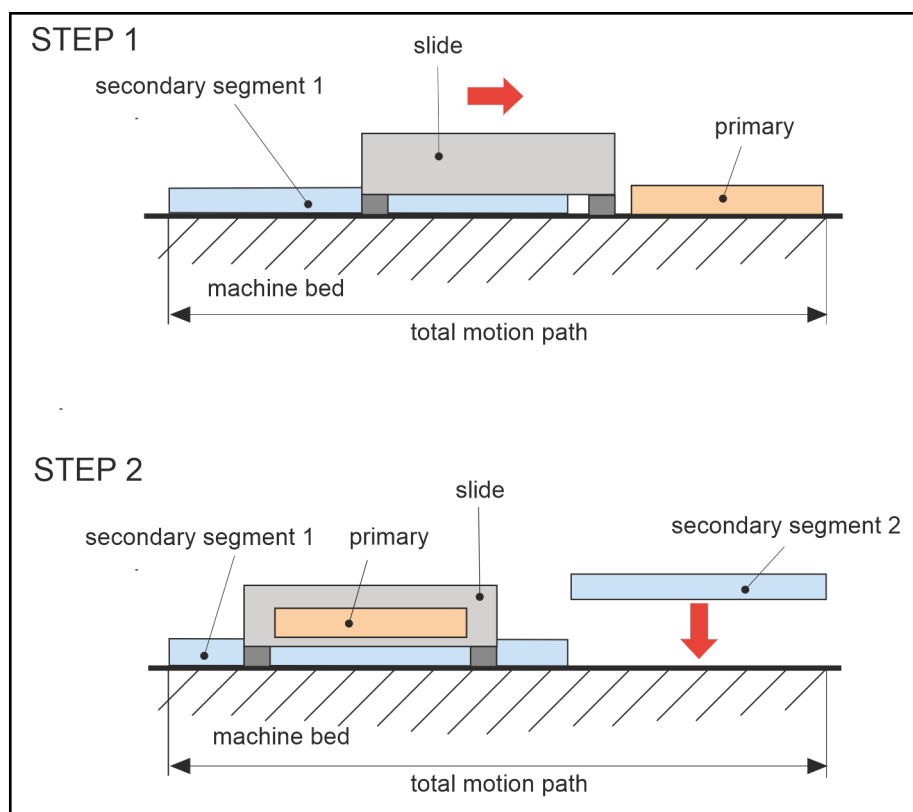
Installation of linear motor components at a path with several secondary parts
